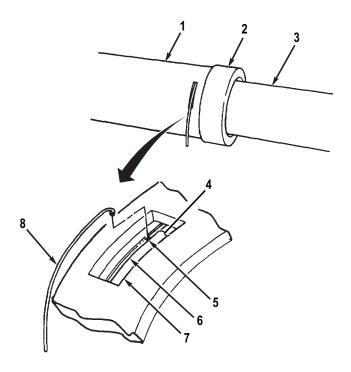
Hydraulic Positioning Cylinder (with Side Lift Kit) Assembly.
